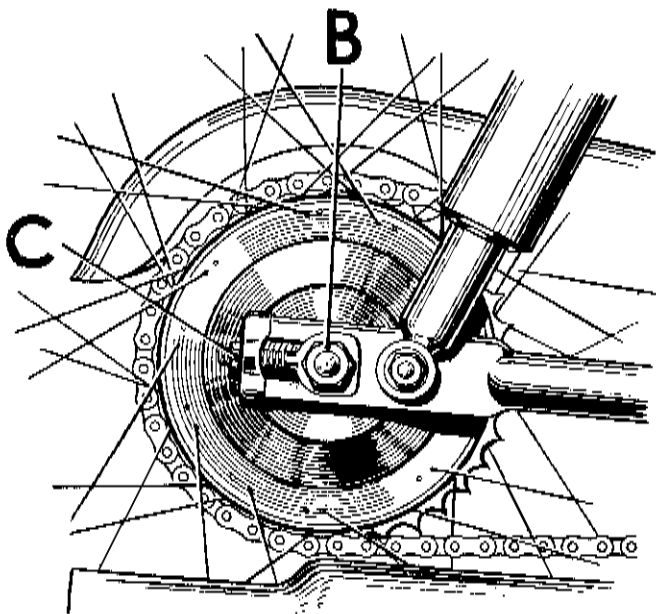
Rear Wheel Removal and Chain Adjustment.
